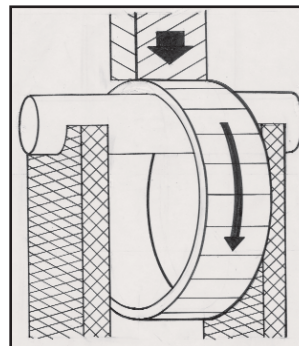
Open die forging of rings starts with a preform on a saddle/mandrel. Progressive reduction of the wall thickness to increase the diameter achieves the required dimensions. Subsequent machining delivers near net shape.
